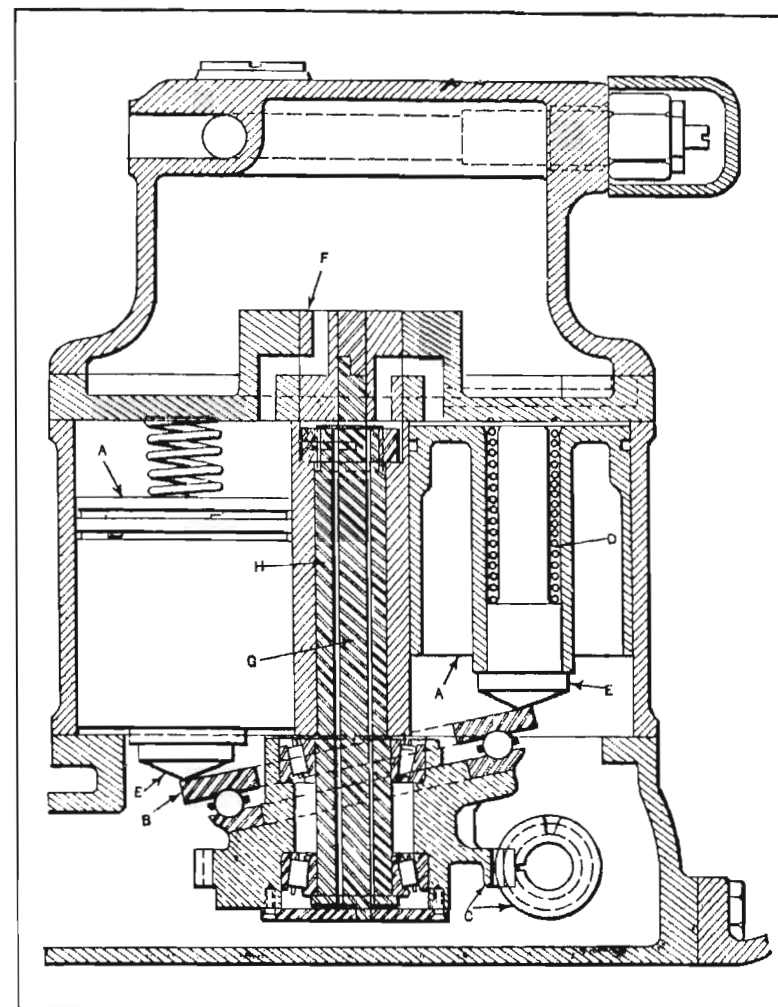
Reciprocating Mechanism of Air Compressor for an Oil Burner
